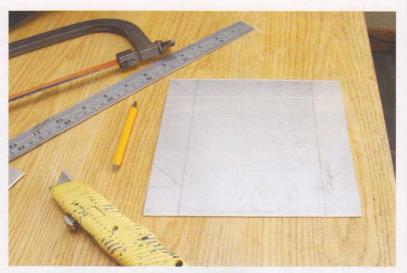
Scoring aluminium sheet to make it ready for bending.
